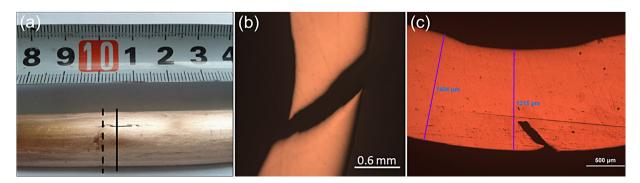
(a) A picture showing axial cracking; (b) and (c) are cross-section views of the crack and correspond to solid line and dashed line in (a), respectively.
